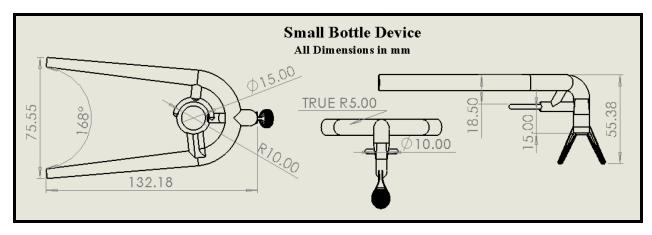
SolidWorks drawing showing dimensions of the Small Bottle Device.
